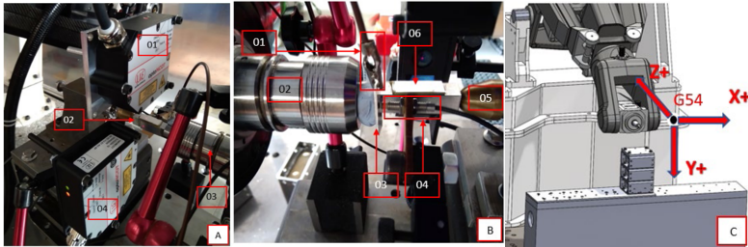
(A)- LDS setup to measure the tool displacement in X and Y directions (1: LDS1, 2: Cutting tool, 3: Tool holder, 4: LDS2). (B)- ECS setup to measure the displacement in the Z direction (1: Ground cable, 2: Tool holder, 3: ECS target plate, 4: ECS, 5: Force sensor tip, 6: Cutting tool). (C)- Orientation of the G54 coordinate system.
